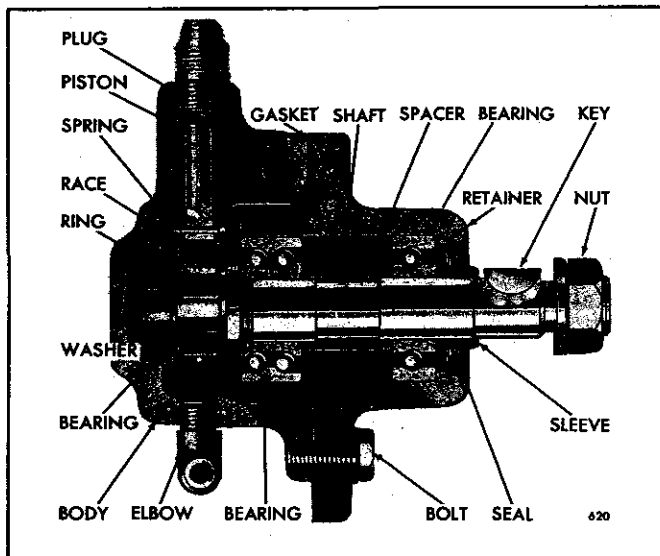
Belt-Driven Hydrostarter Charging Pump
